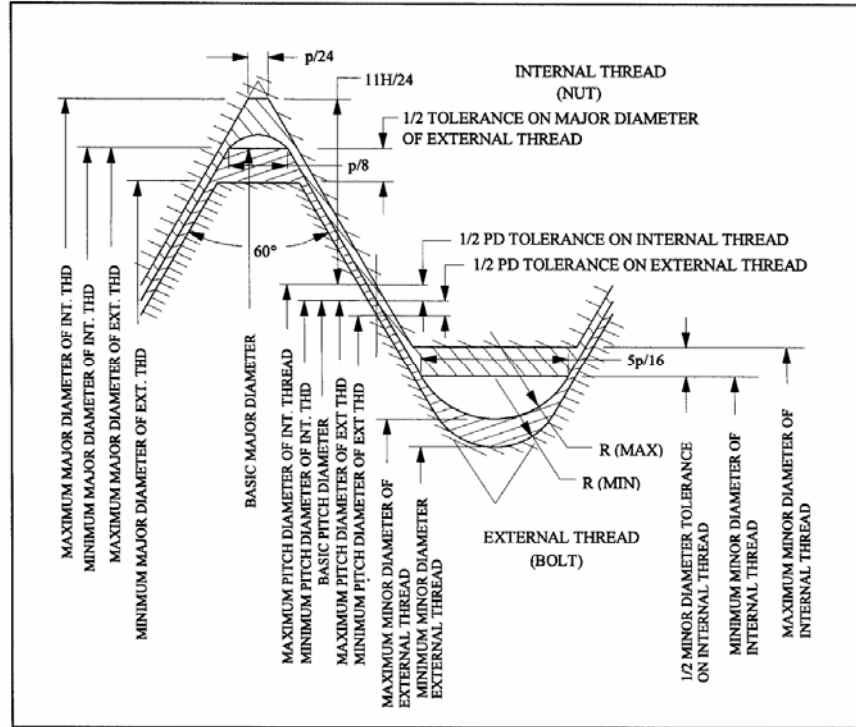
UNJ Thread Tolerances (39)
